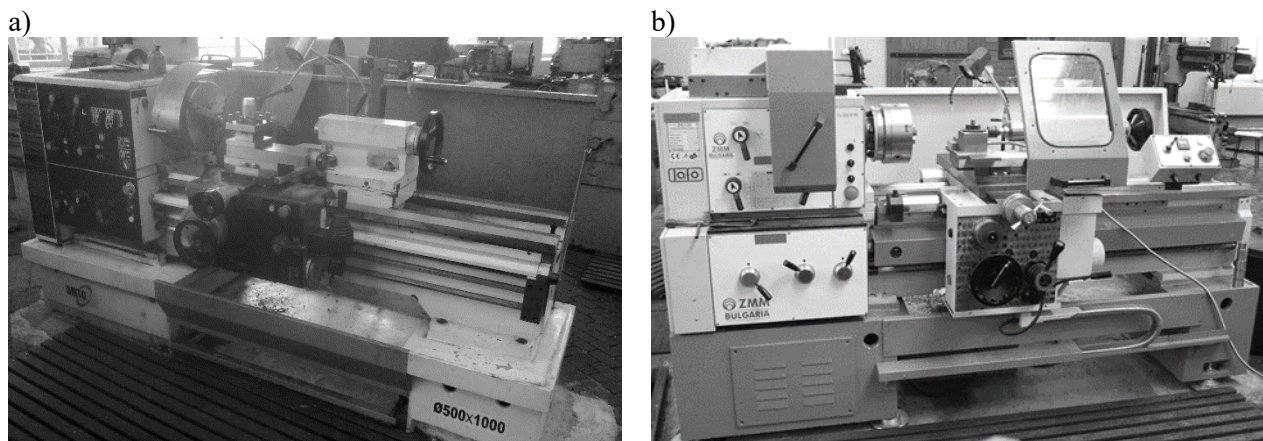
Lathe type: a) CDS 6250 BX-1000 b) CU500MRD
